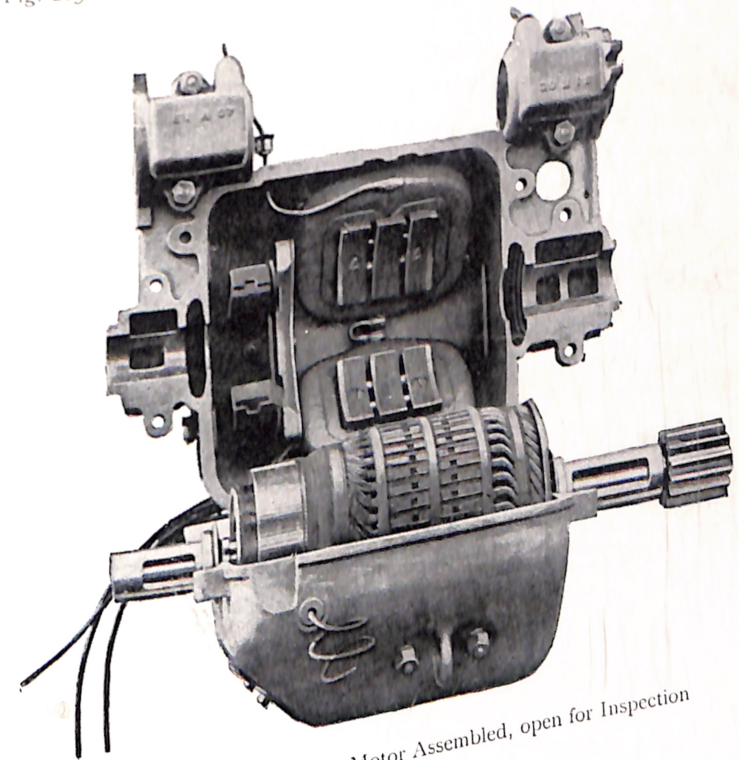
No. 25 Type A Motor Assembled, open for Inspection
